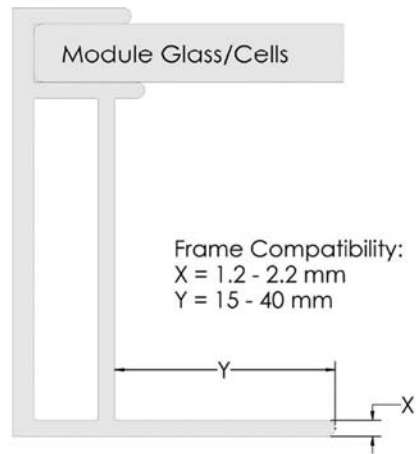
CAMO Clamp Module Frame Dimensional Requirements
